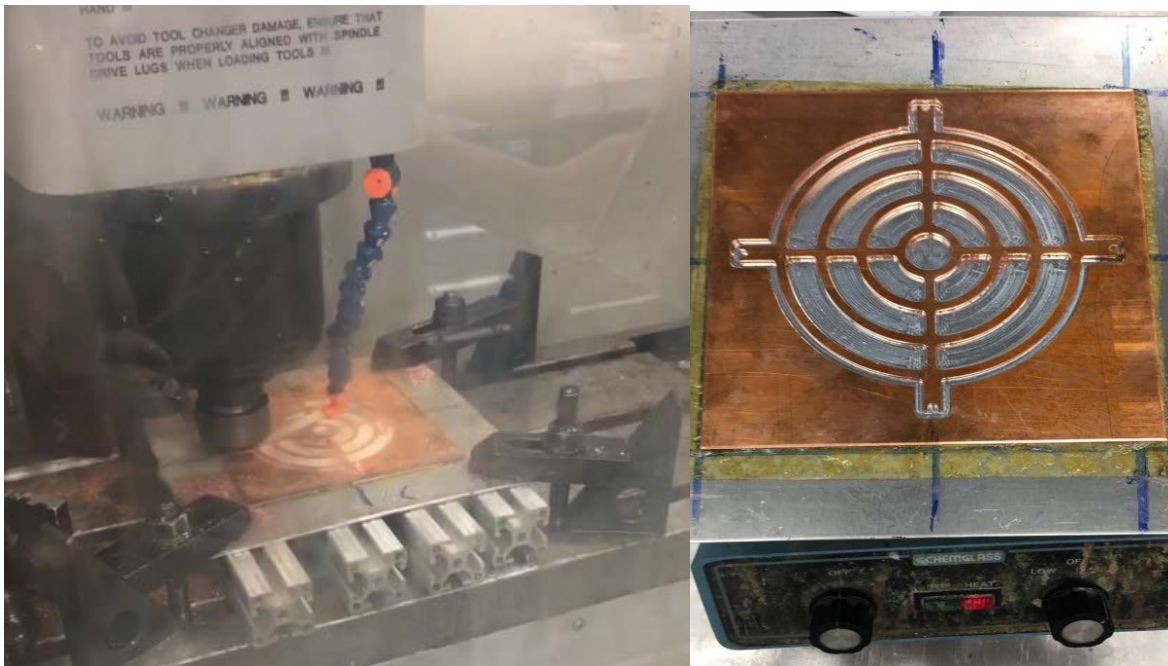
Machining of Top Electrode (left) Heating of Mitee Grip for Part Removal (right)
